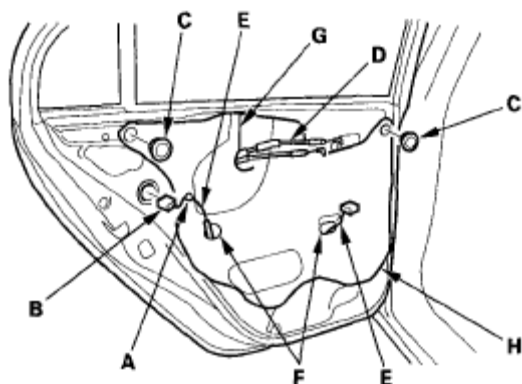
Detaching Harness Clip And Disconnecting Power Door Lock Actuator Connector
